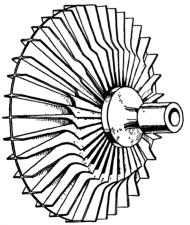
Double-suction impeller of General Electric Co. centrifugal compressor for high-speed jet engine. Note the unshrouded design.
